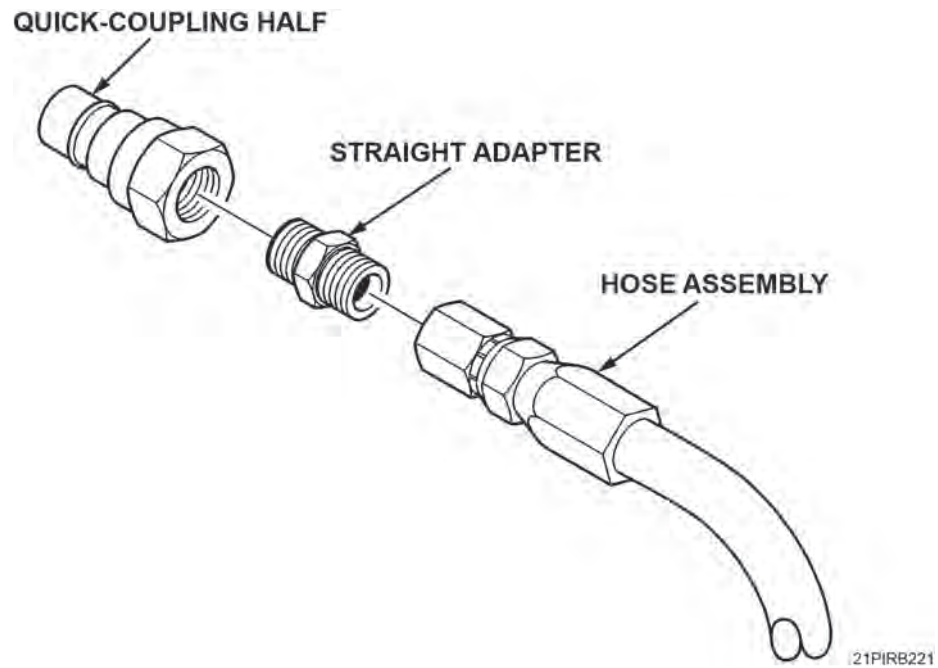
Drain Hose Assembly and Quick-Coupling Half.
